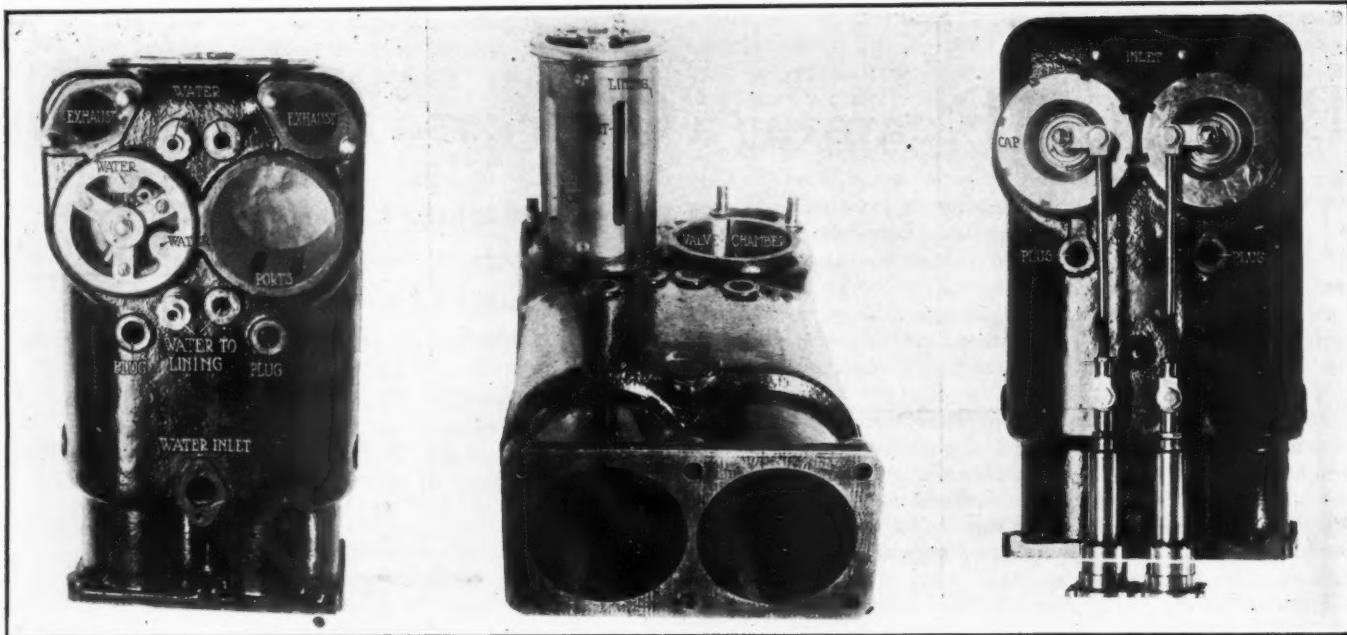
Views of Taft engine in various degrees of assembly with valve and liner in and out of position
